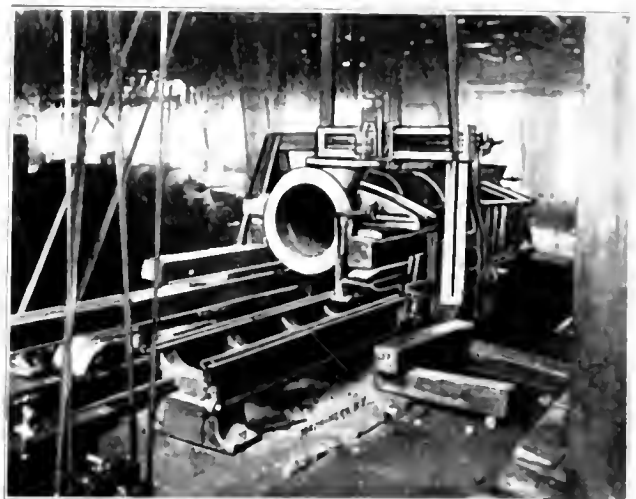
Blocking "Ramps" etc. for Holding Work on Planer
